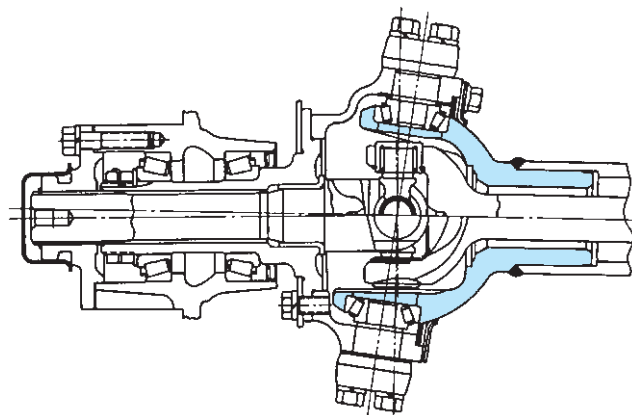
A closed-end axle encloses the CV joint in a round chamber, keeping it clean and lubricated. (Courtesy of Dana Corporation)
